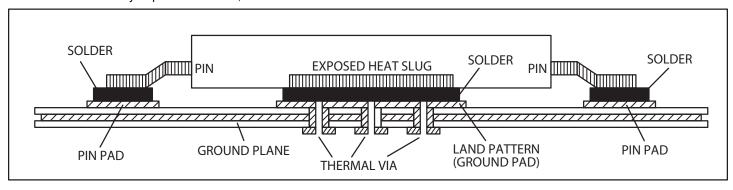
ASSEMBLY FOR EXPOSED PAD THERMAL RELEASE PATH -SIDE VIEW (DRAWING NOT TO SCALE)
